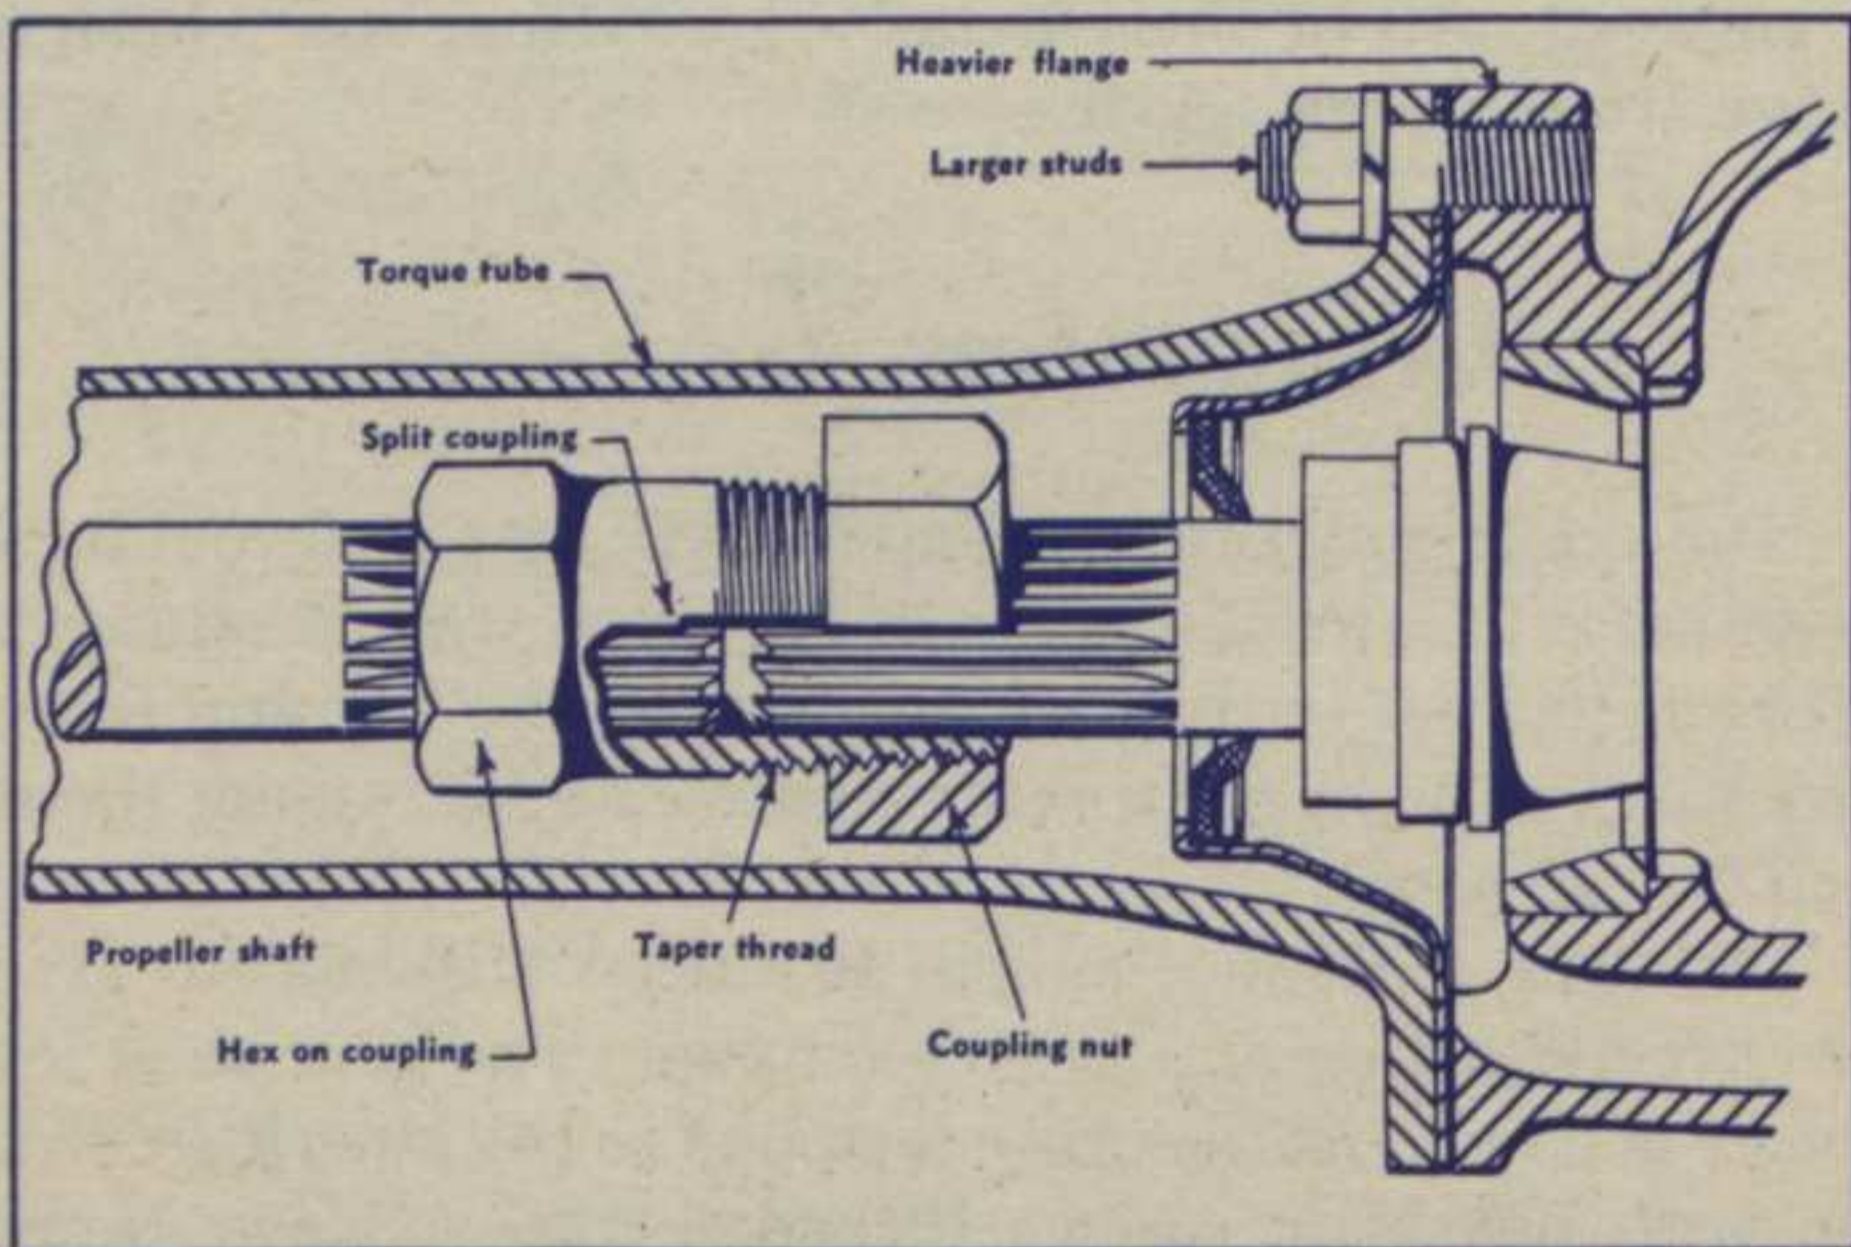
Sketch of "600" improved propeller shaft coupling.
